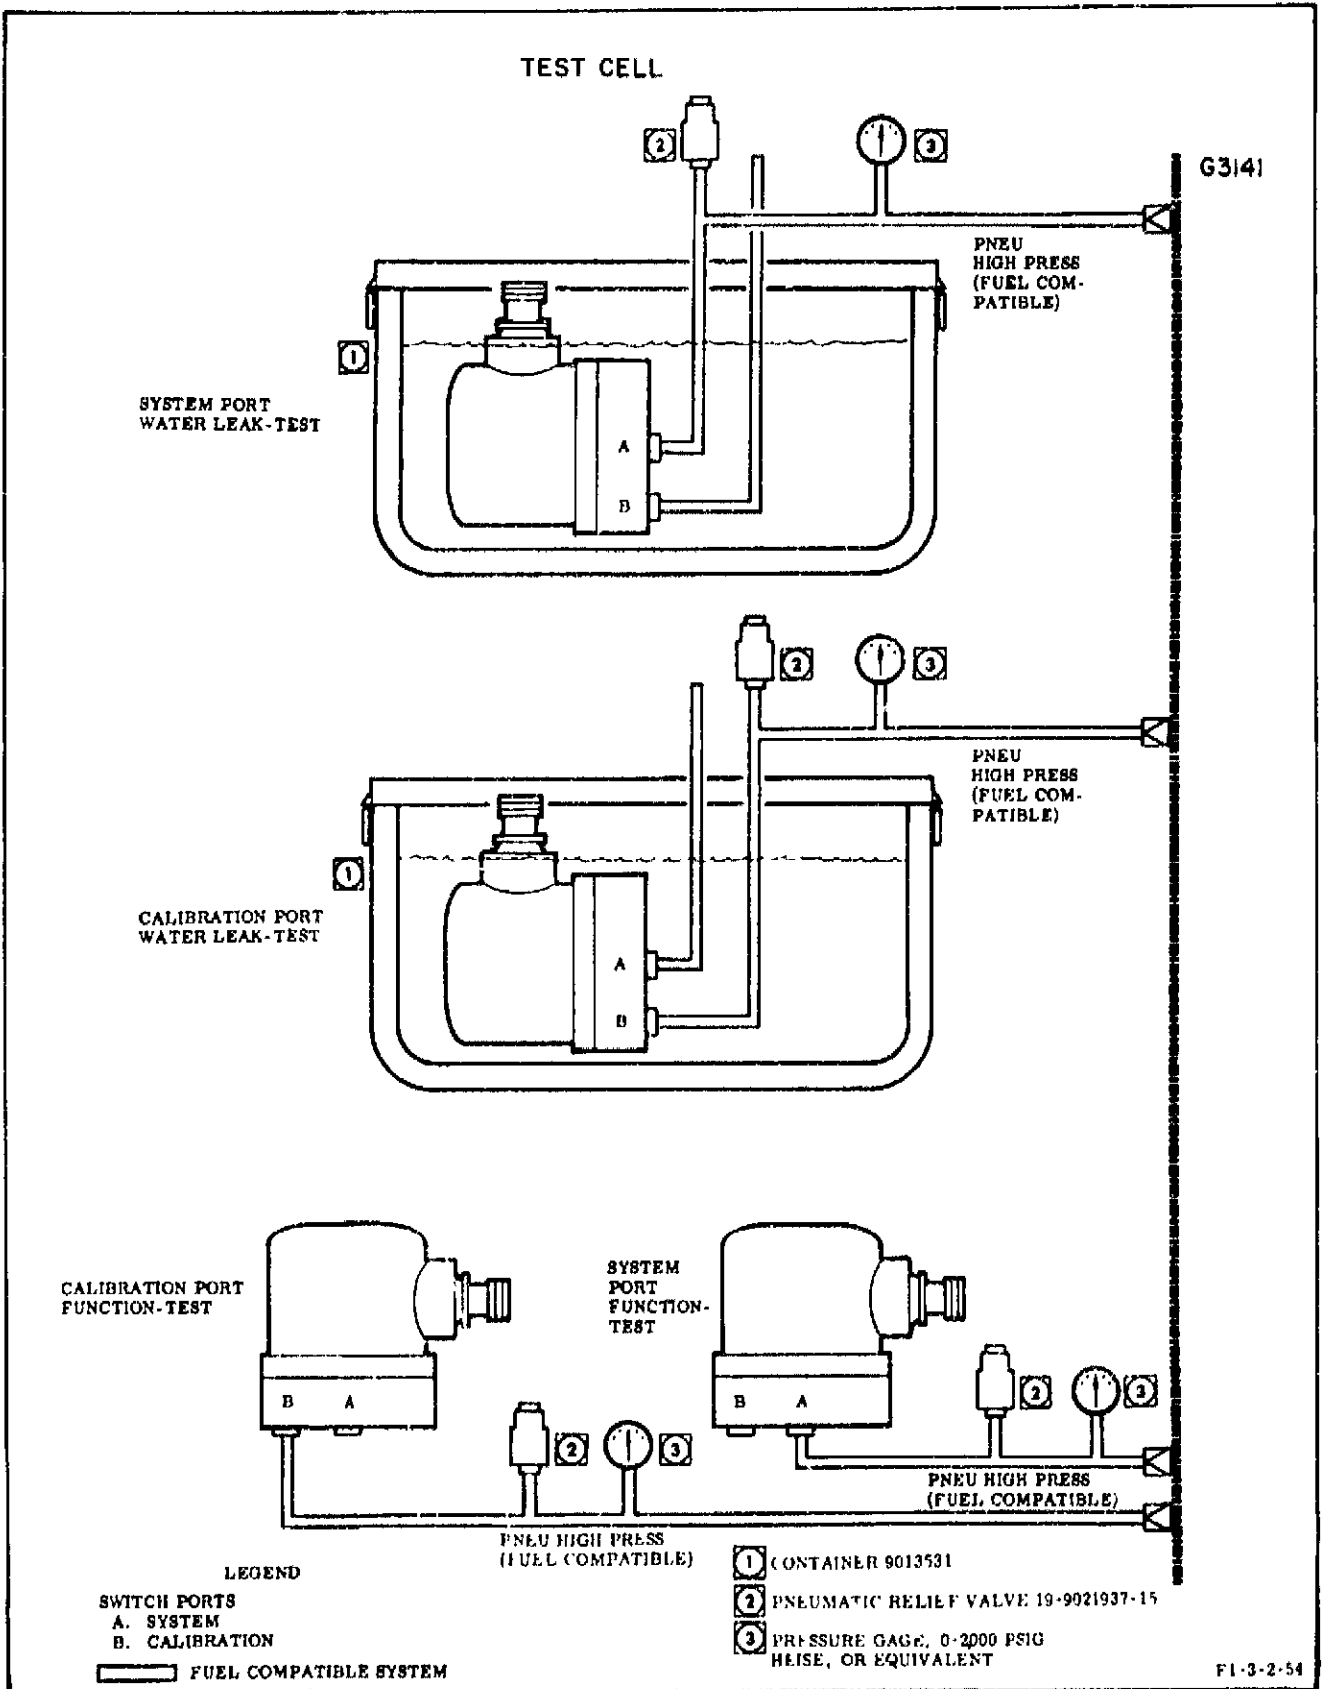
Thrust OK Pressure Switch Test Setups When Using Components Test Console
